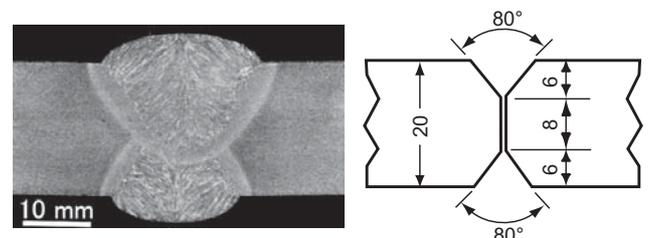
Macroscopic profiles of G-60 / US-36 in a double-side single-pass weld (20-mm thick mild steel base metal; Double-V joint; 4.8-mmØ wire; 750A-33V-400 mm/min. for 1st pass; 900A-38V-350 mm/min. for 2nd pass).
